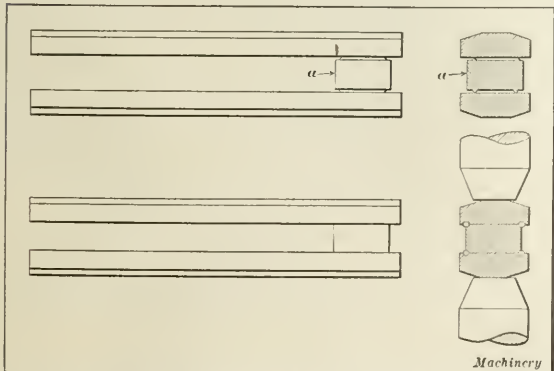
Diagram illustrating Principle applied in the spot-welding of Telephone Transmitter Magnet Bars without drawing the Temper
